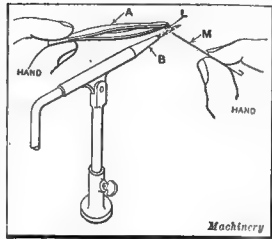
Welding Tungsten and Platinum Wires
